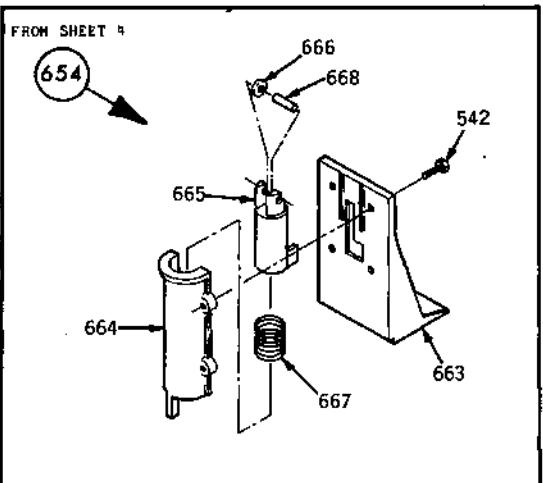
TOP MECHANICAL ASSEMBLY (Sheet 1 of 2)
